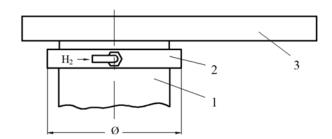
The installed universal plate: 1 – intake manifold; 2 – constructed plate; 3 – box of air filter
